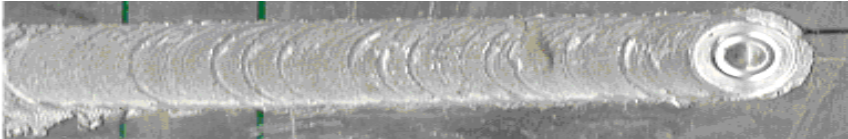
Photograph of FSW joint with varying tool rotational speed (Weld 1)
